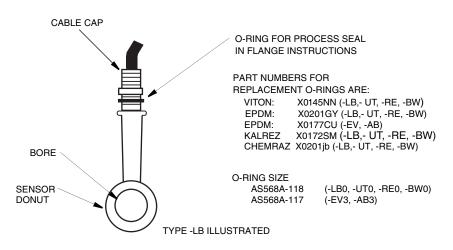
Sensor Types -LB, -UT, -RE, -BW, -EV, and -AB O-ring Seals
